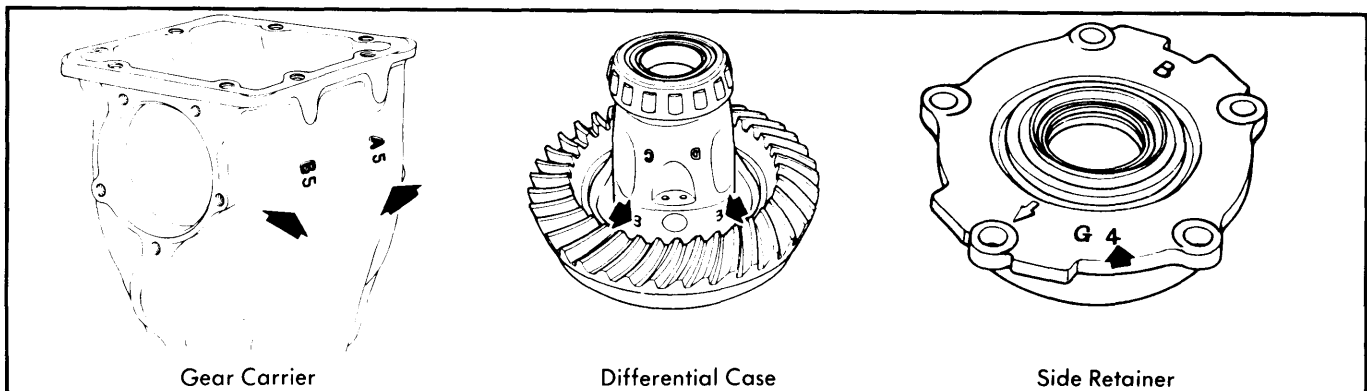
Side Bearing Preload Identification Marks (R180 Differential Shown)
